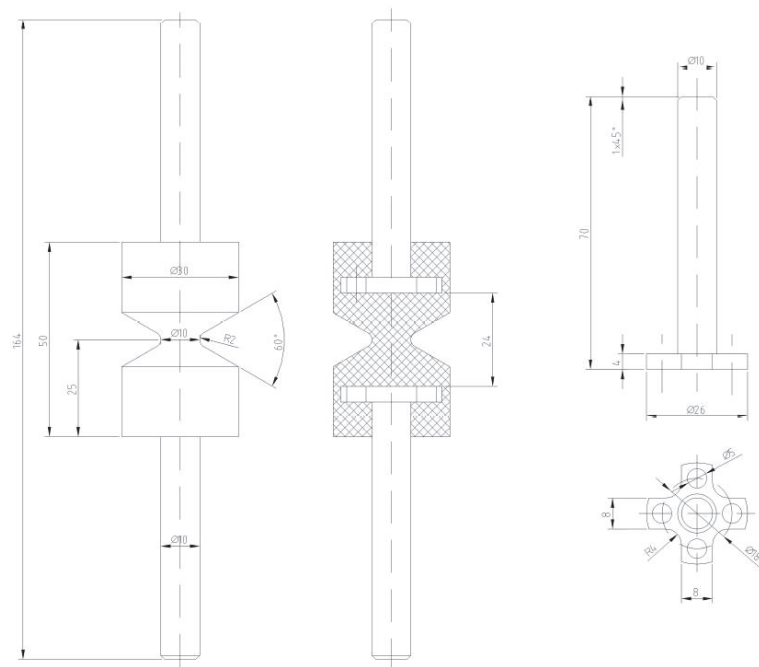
Designed diabolo specimen with metallic fixture for fatigue machine (in mm).
